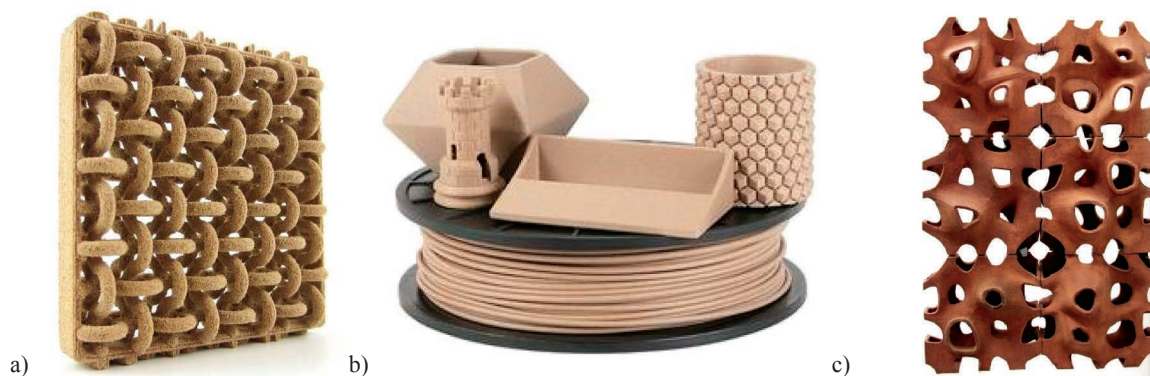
Examples of printed models: a) SLS technology printed models (<https://3dprint.com/>); b) FDM technology printed model (<https://www.printyourmind3d.ca/products/print-your-mind-3d-woodfill-filament?variant=43074437318>); c) FDM technology printed model (<https://www.forust.com/>)
